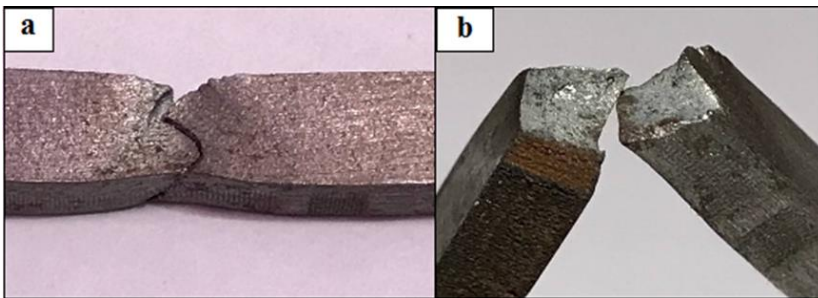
Fracture of one of the A1 tensile test specimens (a): fracture mode (b): cross-section of fracture.
